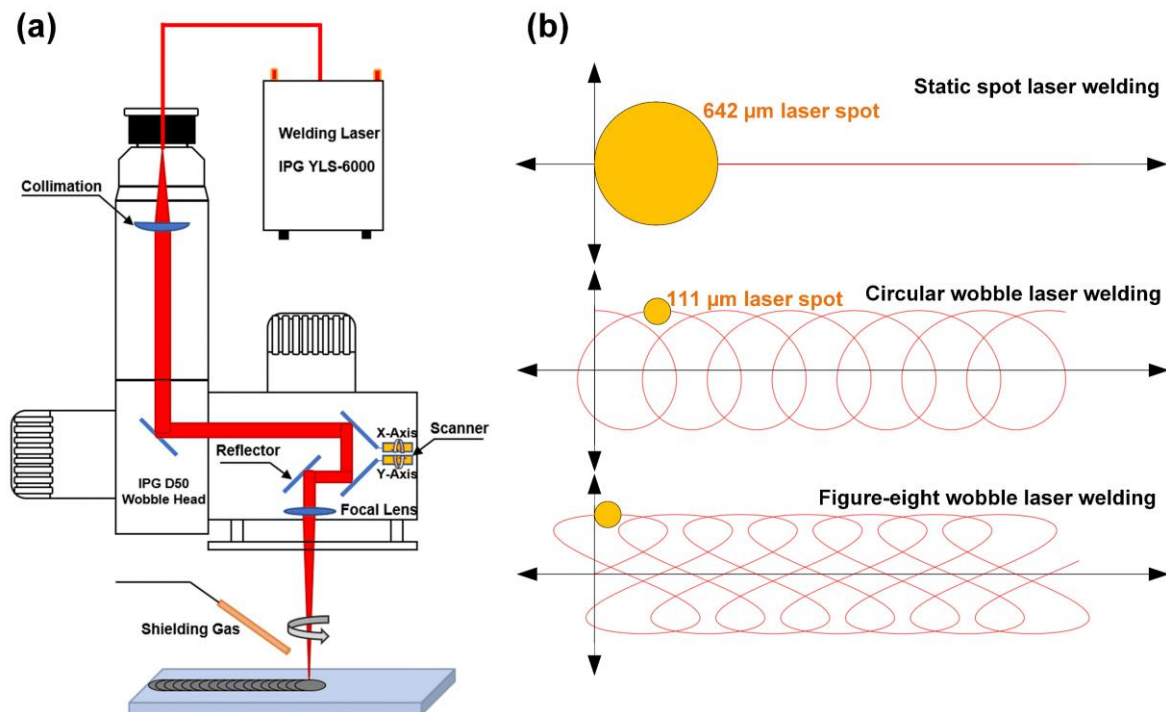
Schematic diagram of wobble laser welding: (a) experimental set-up; (b) laser wobble patterns.
